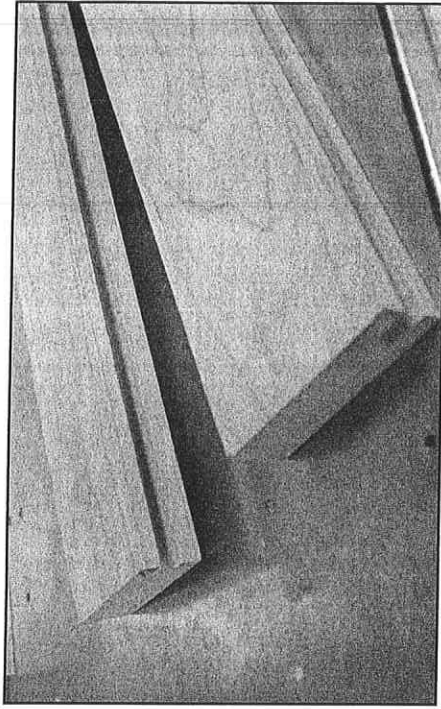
The groove is cut along the length of all pieces using both vertical and horizontal hold downs and moving the workpiece from left-to-right.
